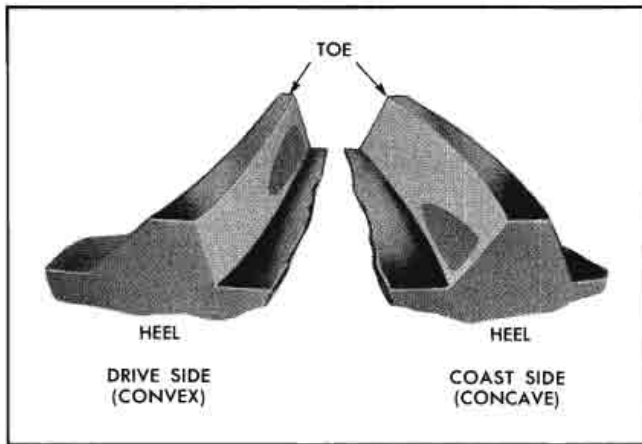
Tooth Pattern when Pinion is Too Close to Ring Gear (Shim Pack Thickness Excessive)
